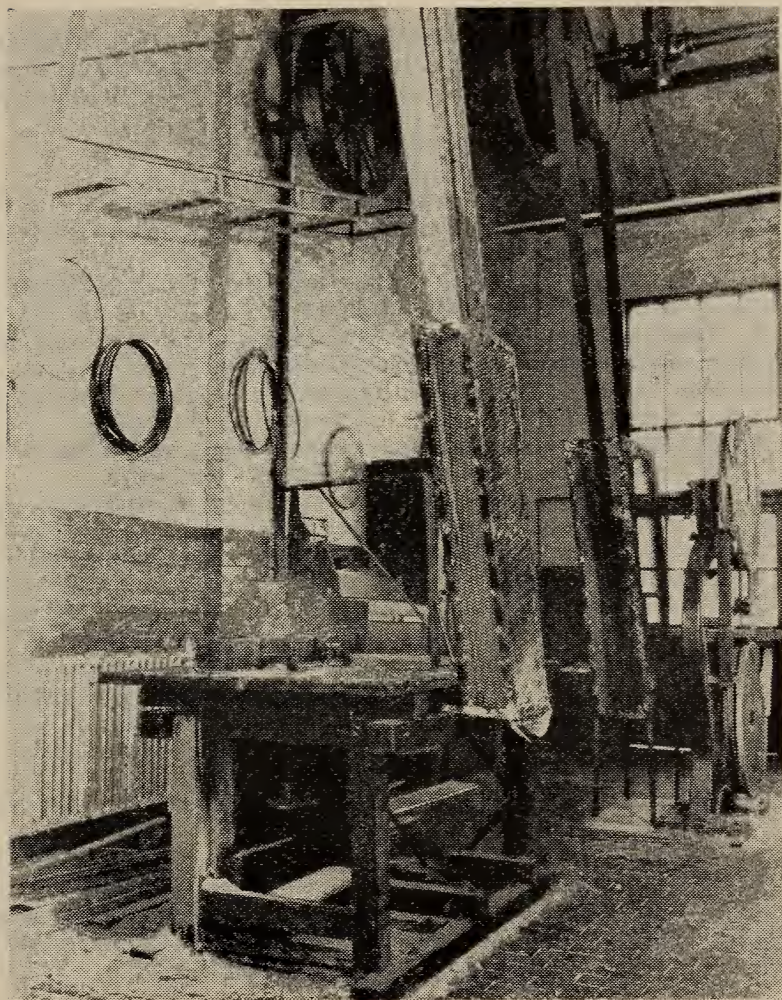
Transmission belts and moving parts of machinery should be guarded effectively.
